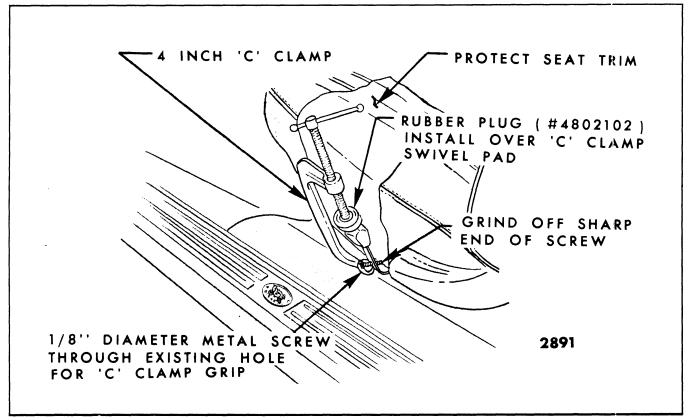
Front Seat Adjuster Control Knob - Installation - Side Control Knob Shown - Front Control Knob Typical
